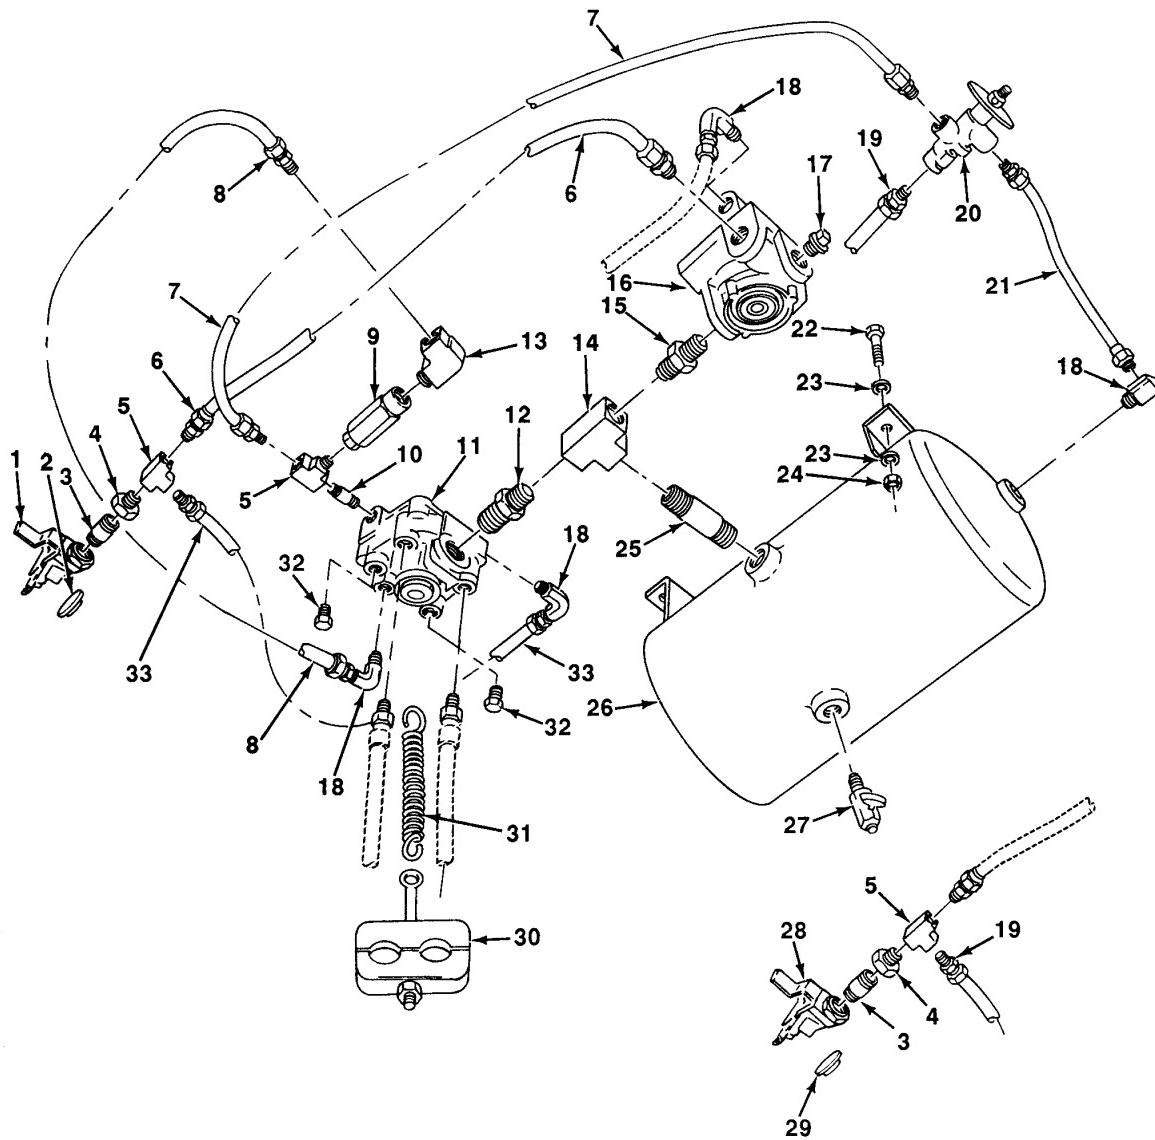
Airbrake Valves, Lines, and Fittings, Front.
